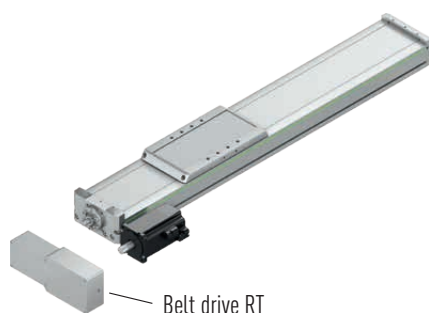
Motor adapter of the linear tables HT-S without belt drive
